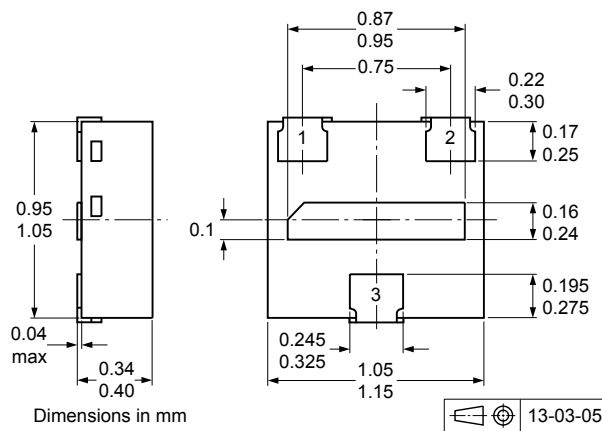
Package outline DFN1010D-3 (SOT1215)
